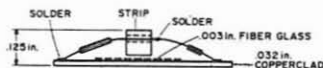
Side view shows terminal strip utilization and mounting technique.
